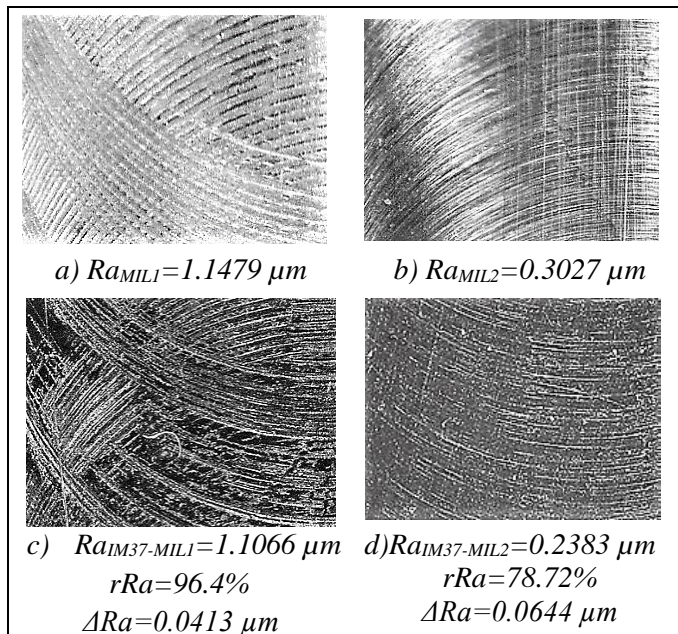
(SEM) and Fig. 5.24a (detail of 2 mm x 1.5 mm) show the impression of *MIL1* face milled with a five millimeter TiAlN coated carbide tool with a speed of 7200 min^{-1} , cutting depth of 0.01 mm and a feed of 500 mm/min. Fig. 5.24c presents the replicated injection molded surface. Fig. 5.26 (SEM) and Fig. 5.24b show the *MIL2* impression face milled with a speed of 10,000 min^{-1} and 200 mm/min feed. Fig. 5.24d shows the corresponding molded surface. The Ra results confirmed the anticipated superior finishing of the surface machined at a higher speed and lower feed.
